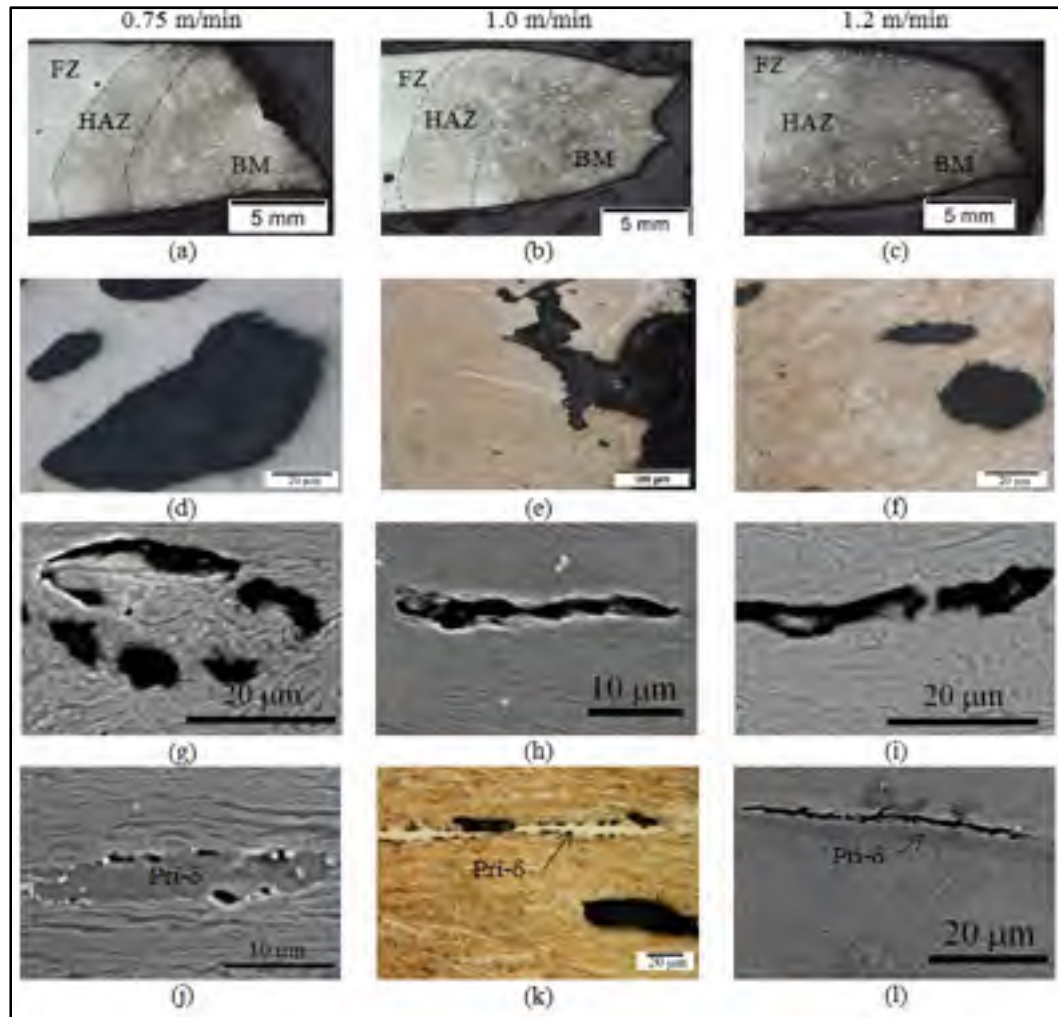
Microstructure along the tensile load direction near the tensile fracture surface of the welds assembled at welding speeds of 0.75 m/min (a,d,g,j), 1.0 m/min (b,e,h,k) and 1.2 m/min (c,f,i,l)
